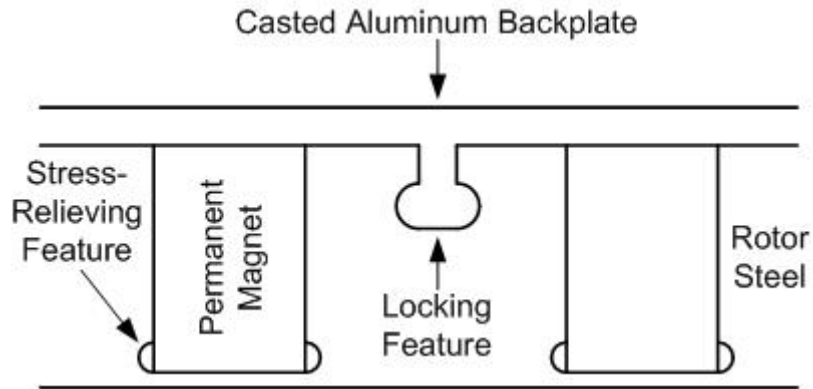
Cross-section through a rotor plate with casted aluminum backplate
